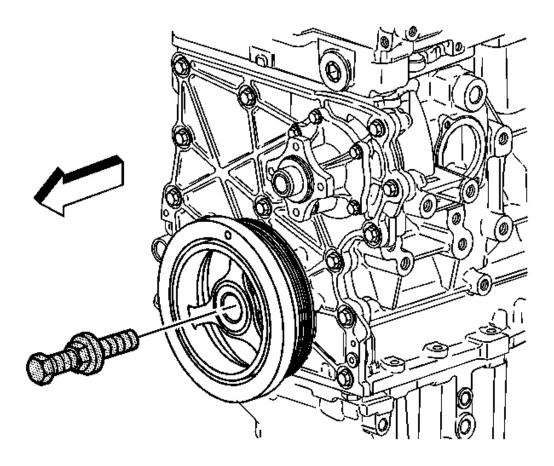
Installing Crankshaft Balancer Using The J 41478 Courtesy of GENERAL MOTORS CORP.
